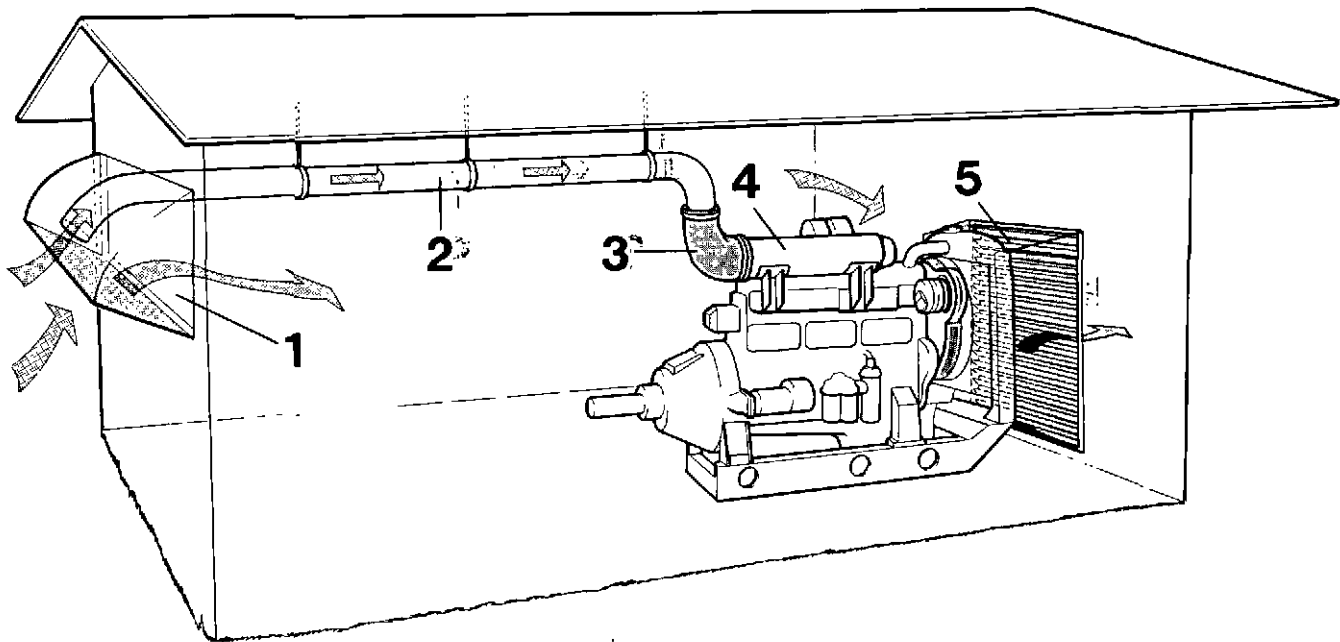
Engine room with air intake and air outlet (pressure fan)
